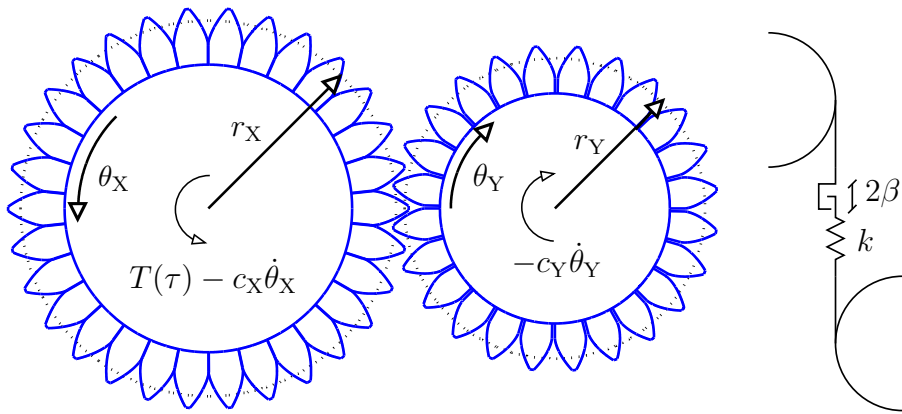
The external torques acting on the shafts of meshing gears. The right hand side drawing illustrates the interaction force between the gears.
